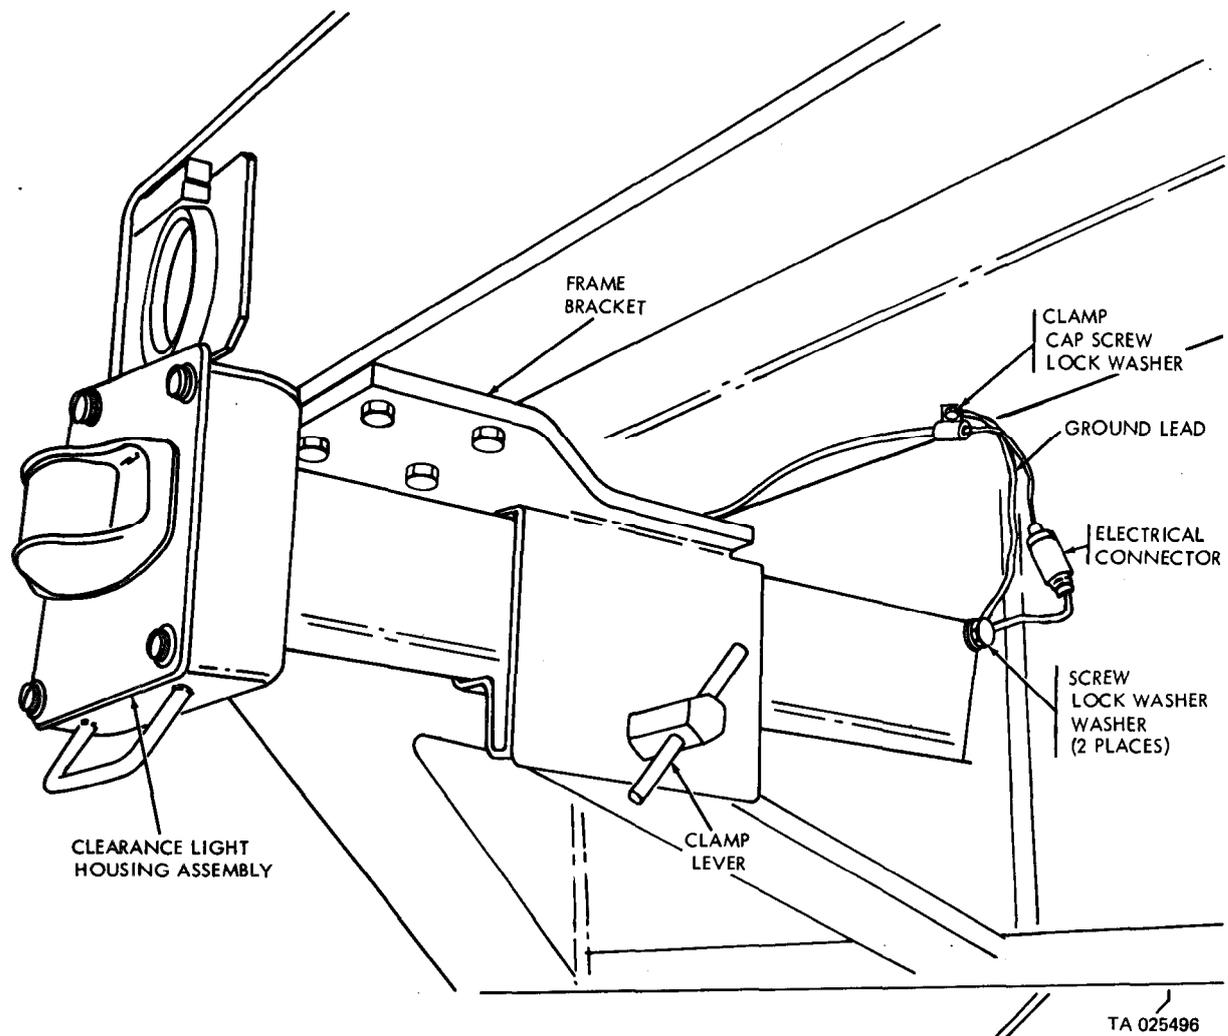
Retractable clearance light housing assembly (semitrailer No. 201 and on).
